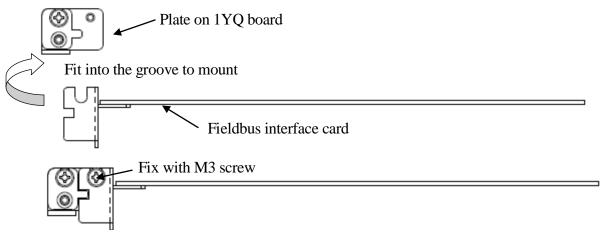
plate on 1YQ board+fieldbus interface card
